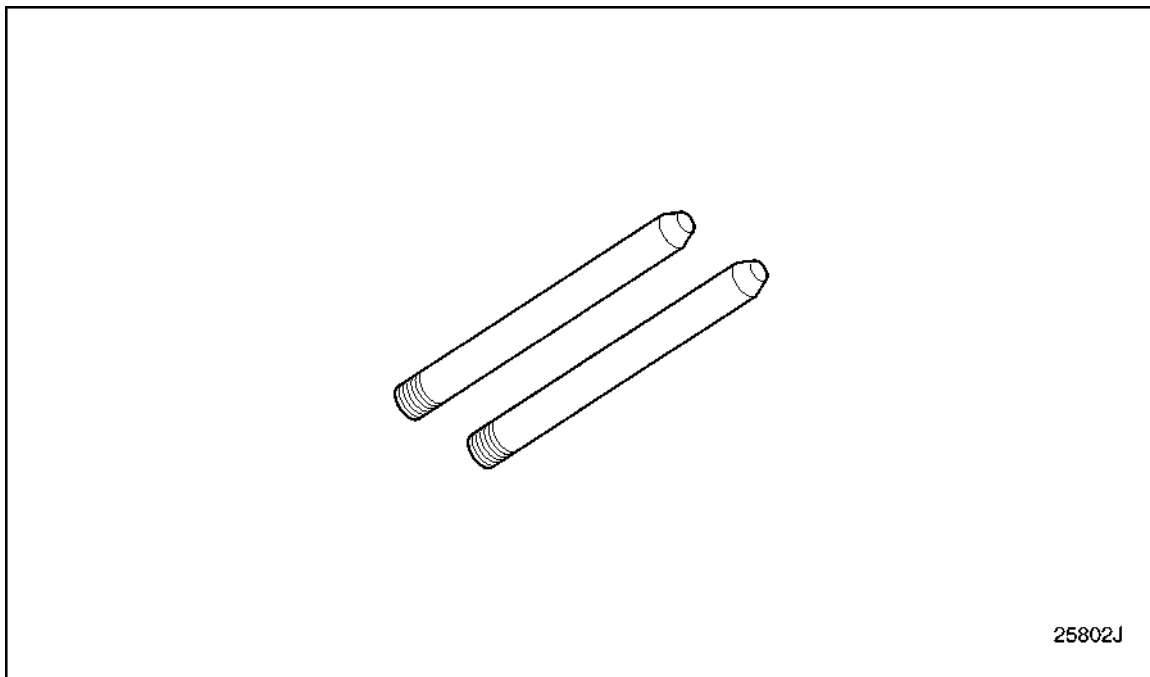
Flywheel Housing Guide StudsJ 34691-A
